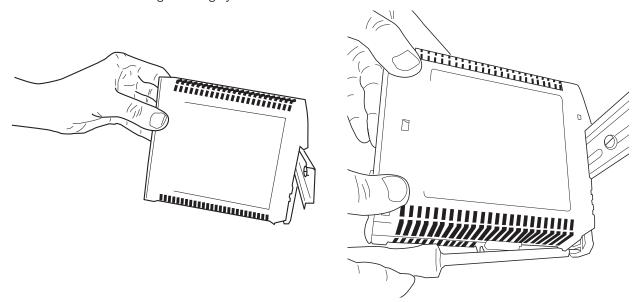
Mounting the VT-HPC-1-1X on the DIN mounting rail
